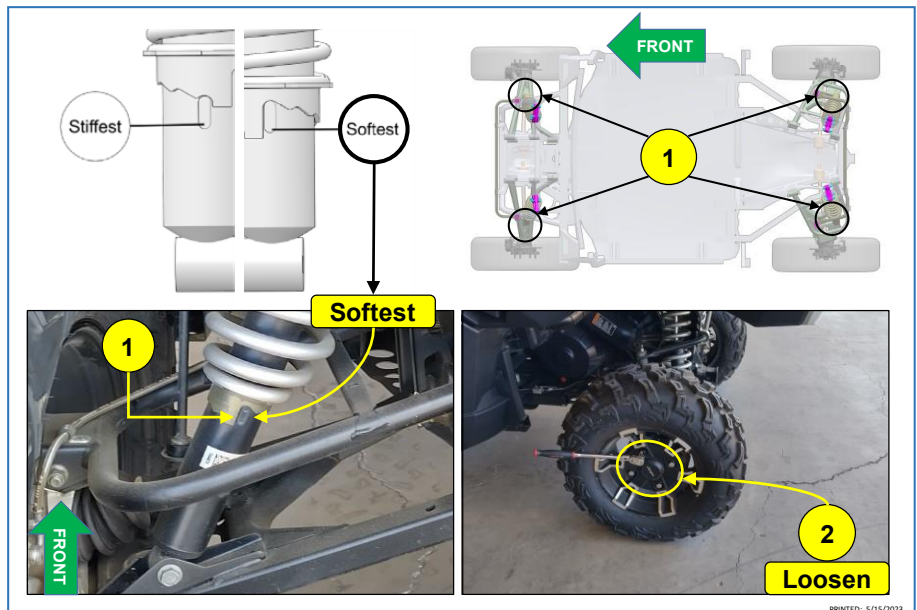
TIP.5 Coil Spring Softest Setting & Lug Nuts
